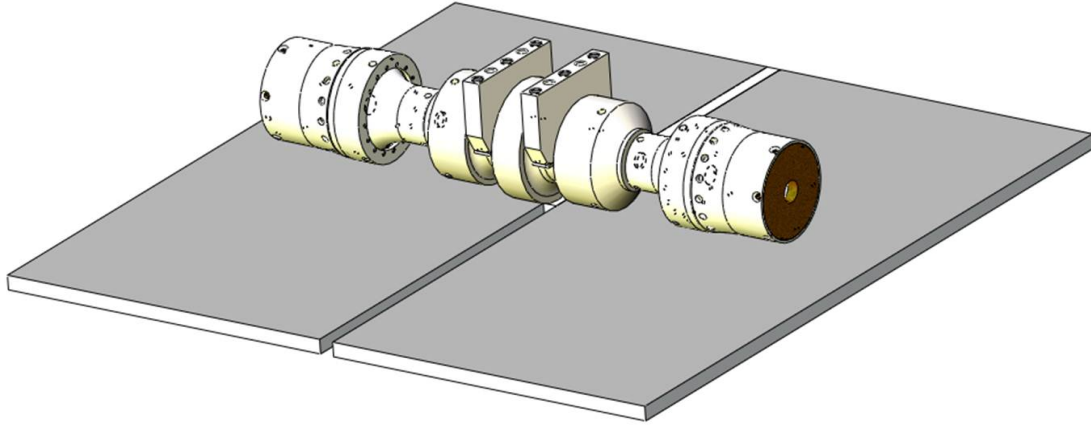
Concept for using ultrasonic welding to join two sheet materials.
